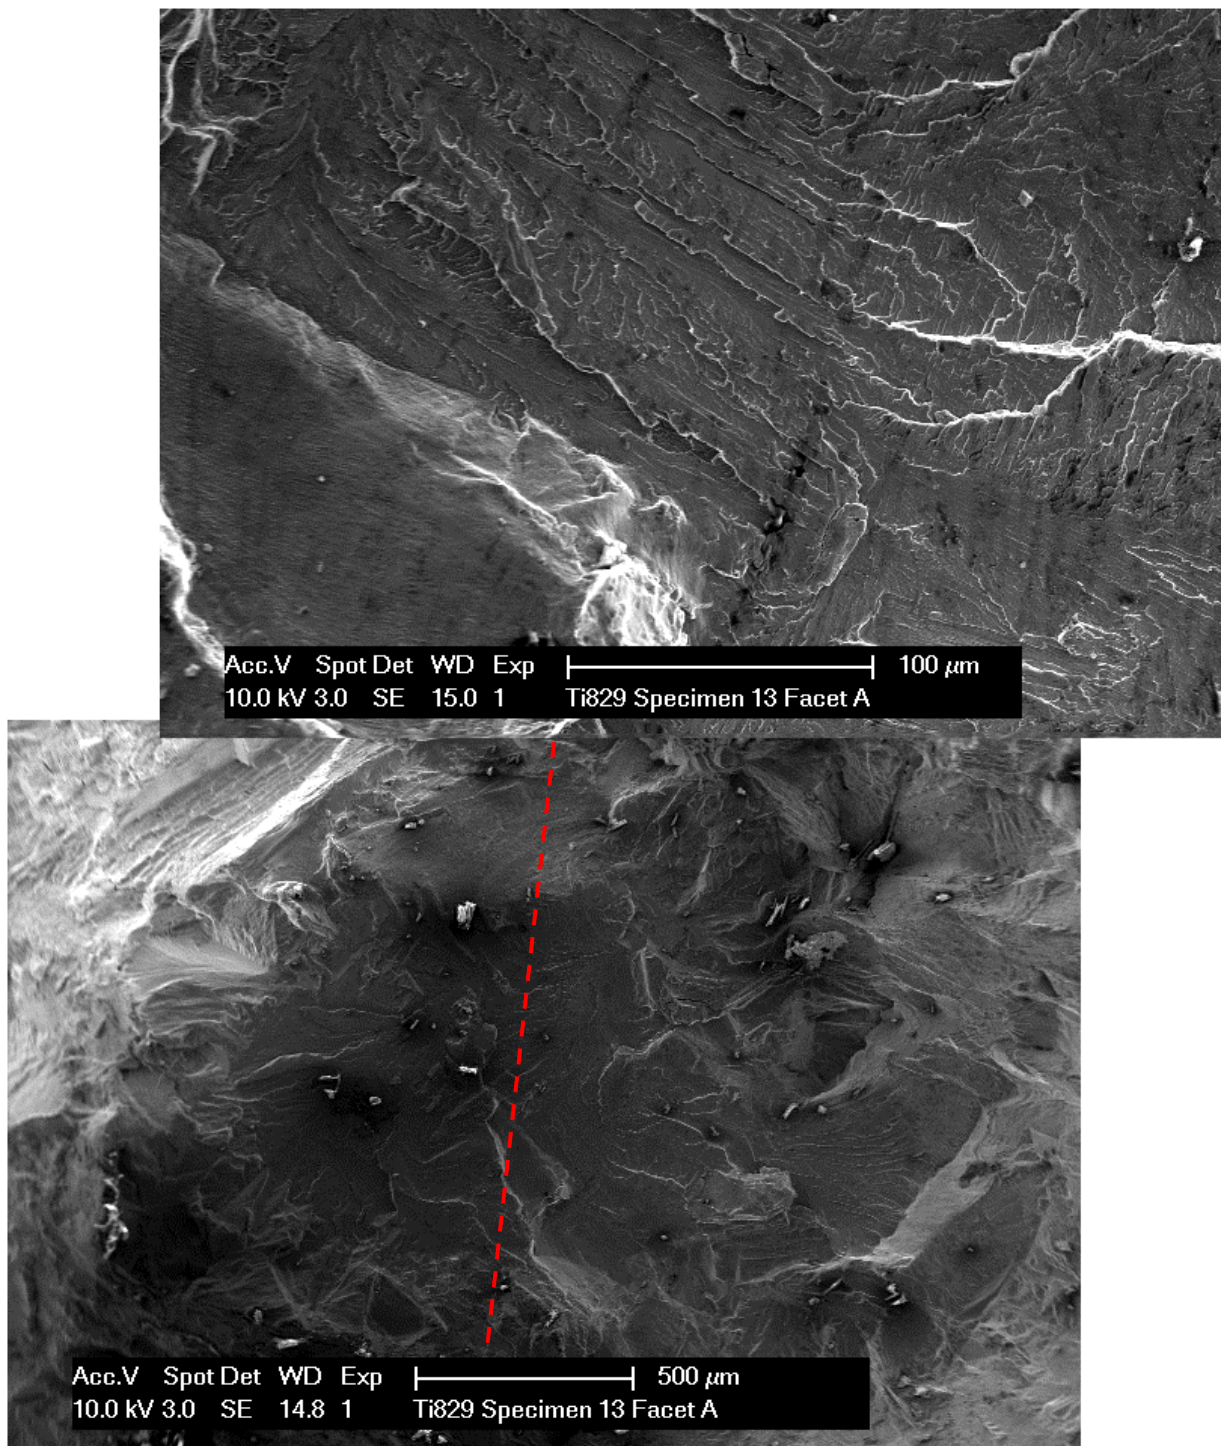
Ti829 dwell LCF test specimen fracture surface – Facet A
